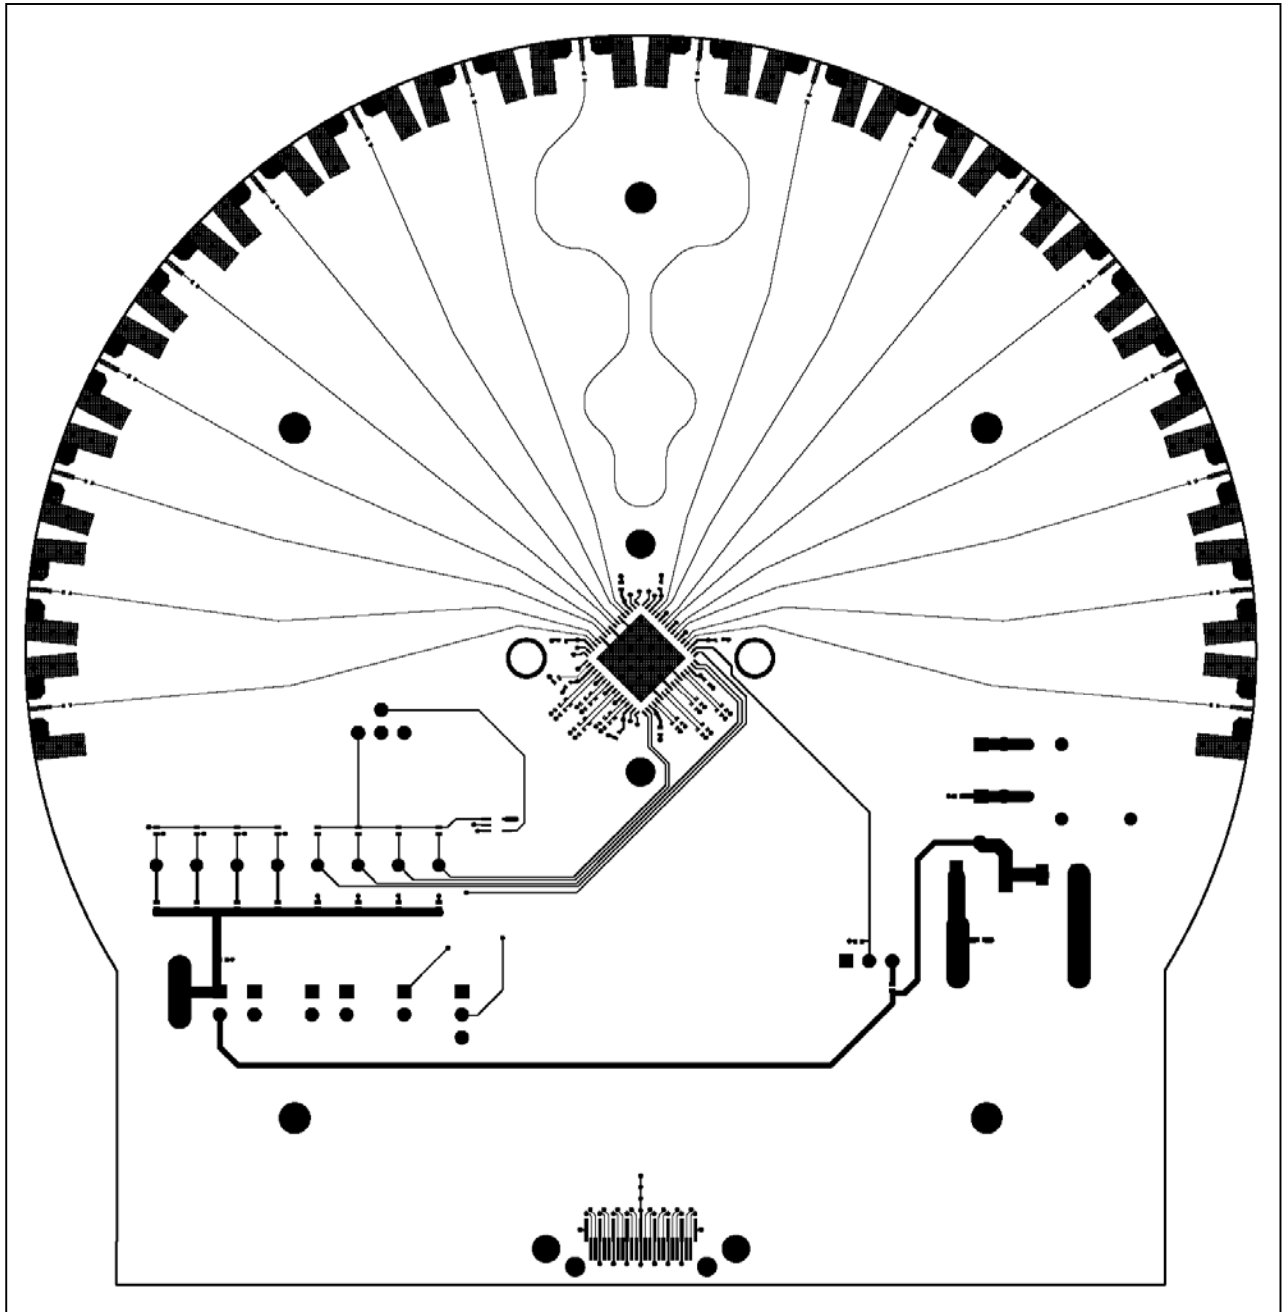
MAX3983 EV Kit PC Board Layout – Component Side (Signal), Layer 1
